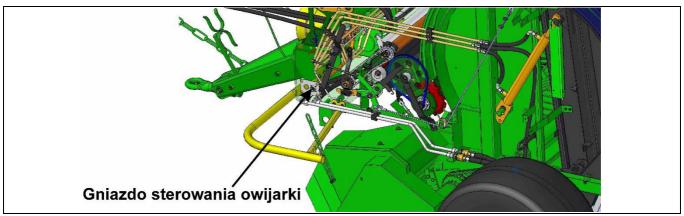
COUPLING THE BALER WITH A WRAPPING MACHINE
